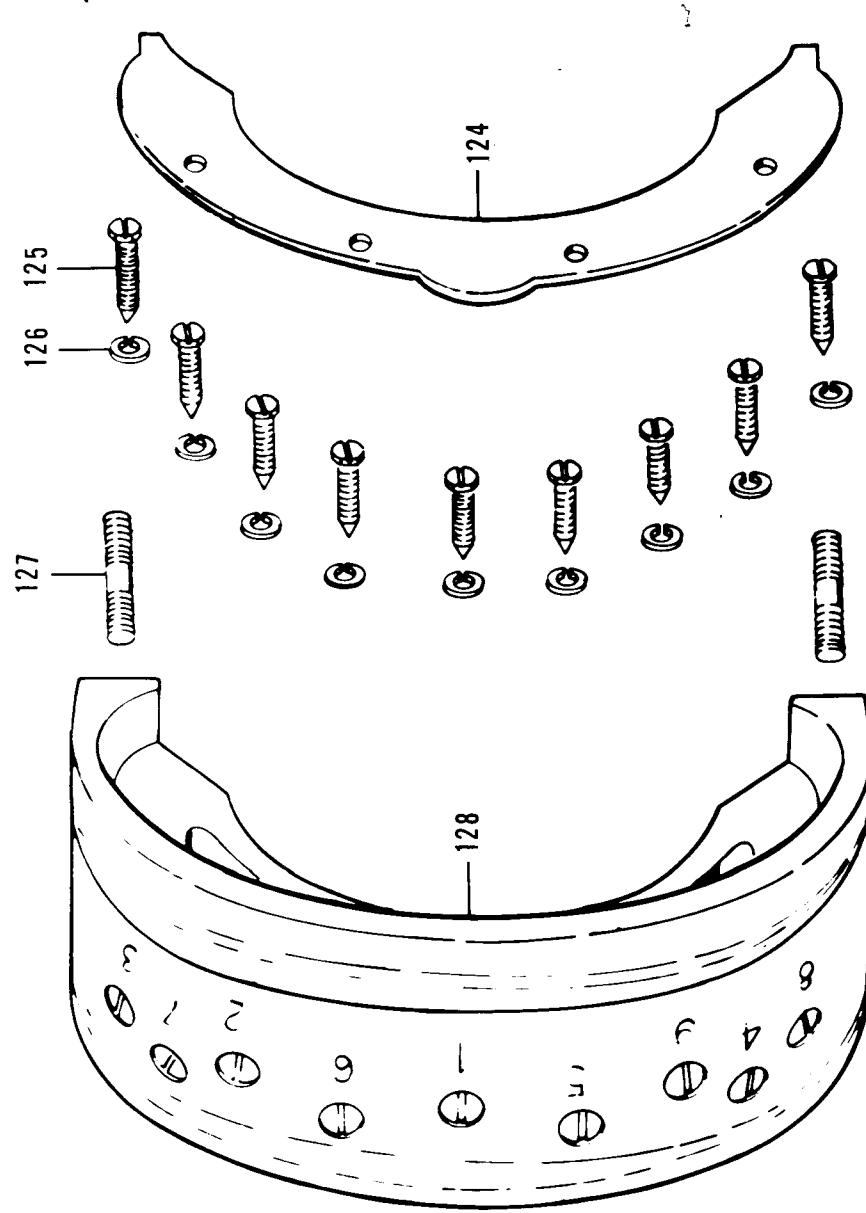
Magneto, Ignition (Block, Distributor) (Sheet 5 of 10)
